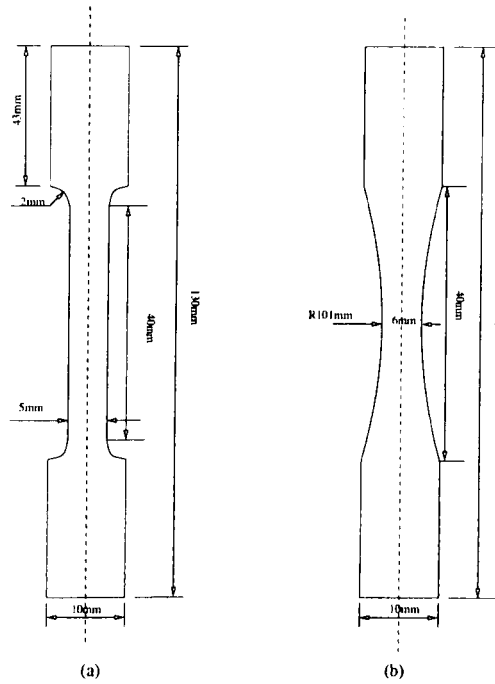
Specimen geometries, (a) Cylindrical specimen; (b) Tapered specimen for failure test.
